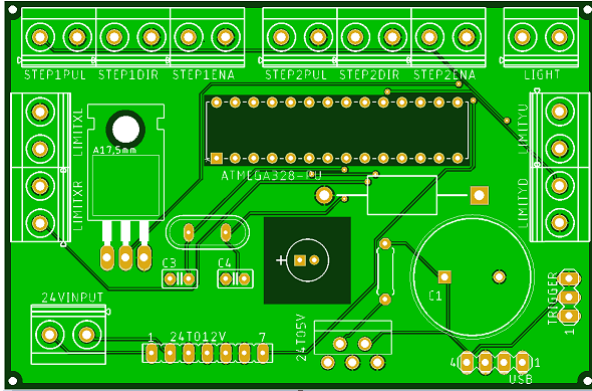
A layout of the final PCB schematic for the Motion-Detecting Sentry Turret
